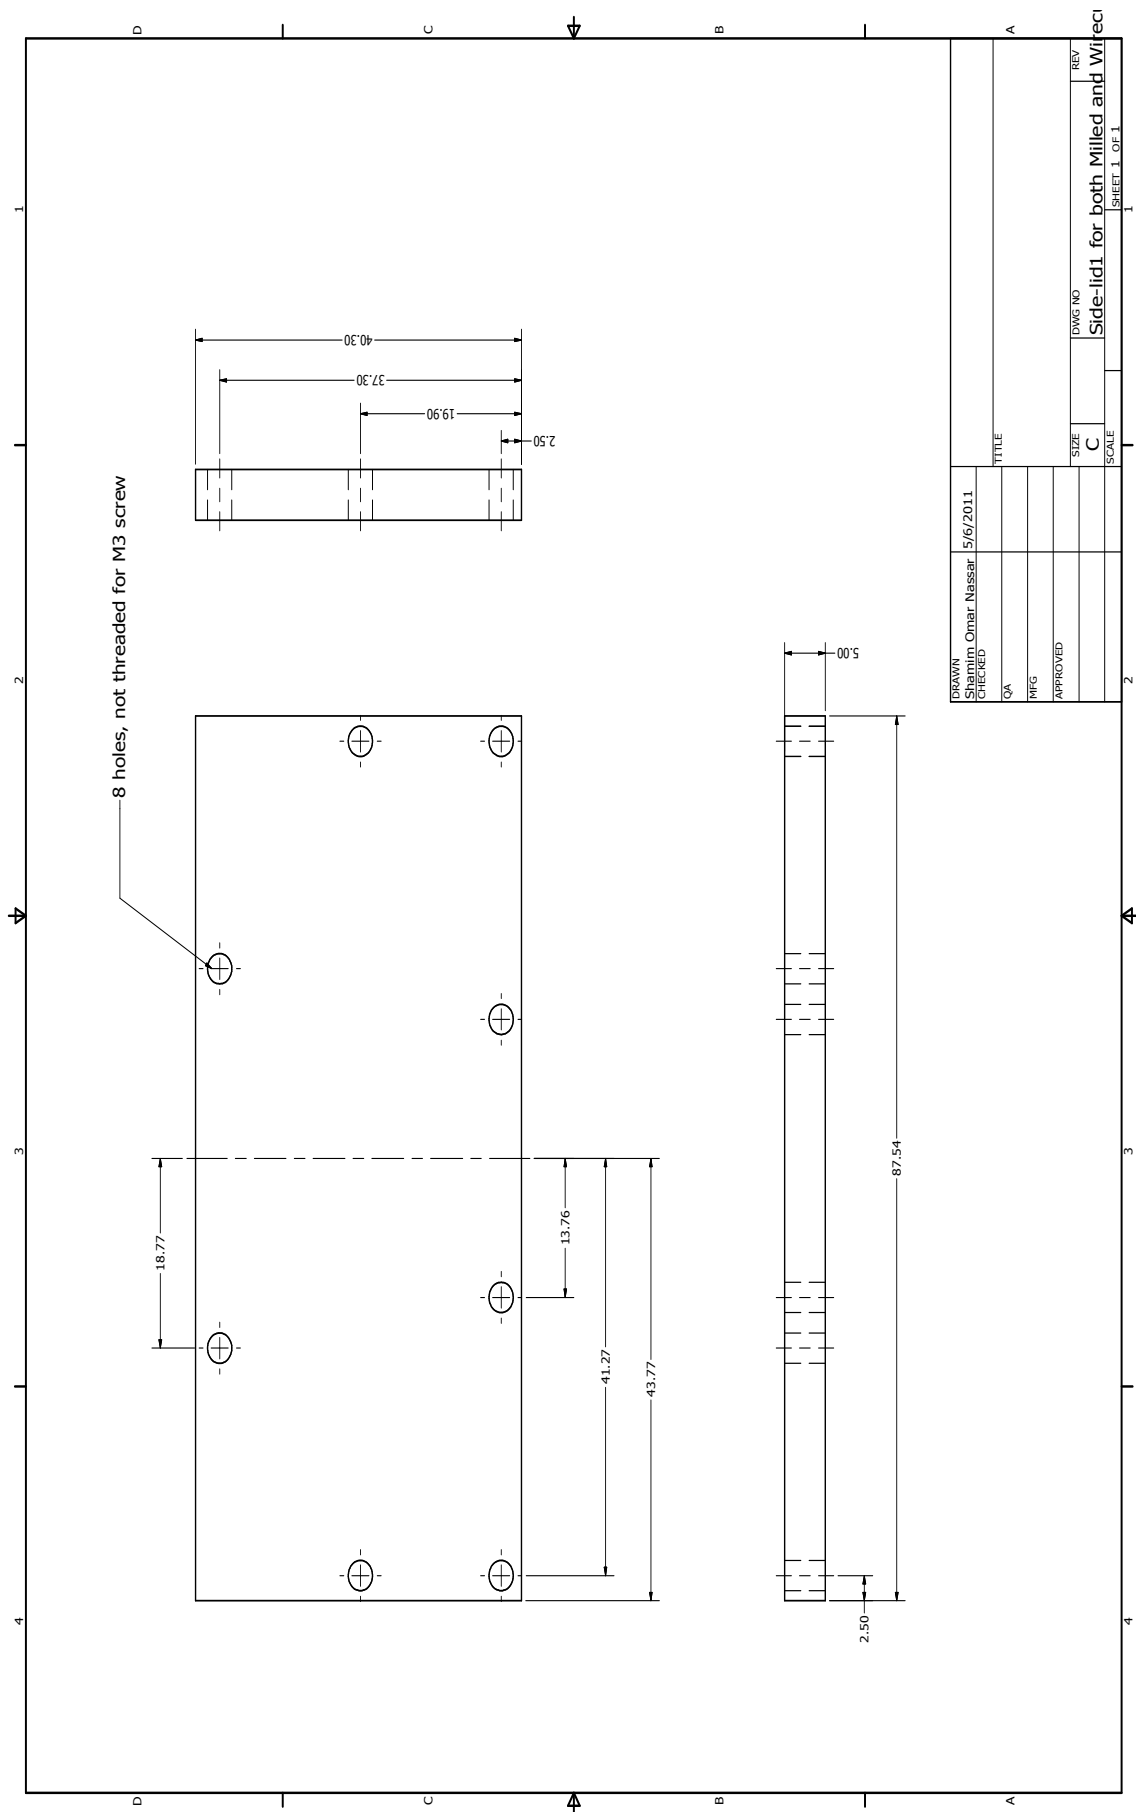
1.3GHz Combine Filter Sidelid Dimensions with Unthreaded Holes - Milling Option
